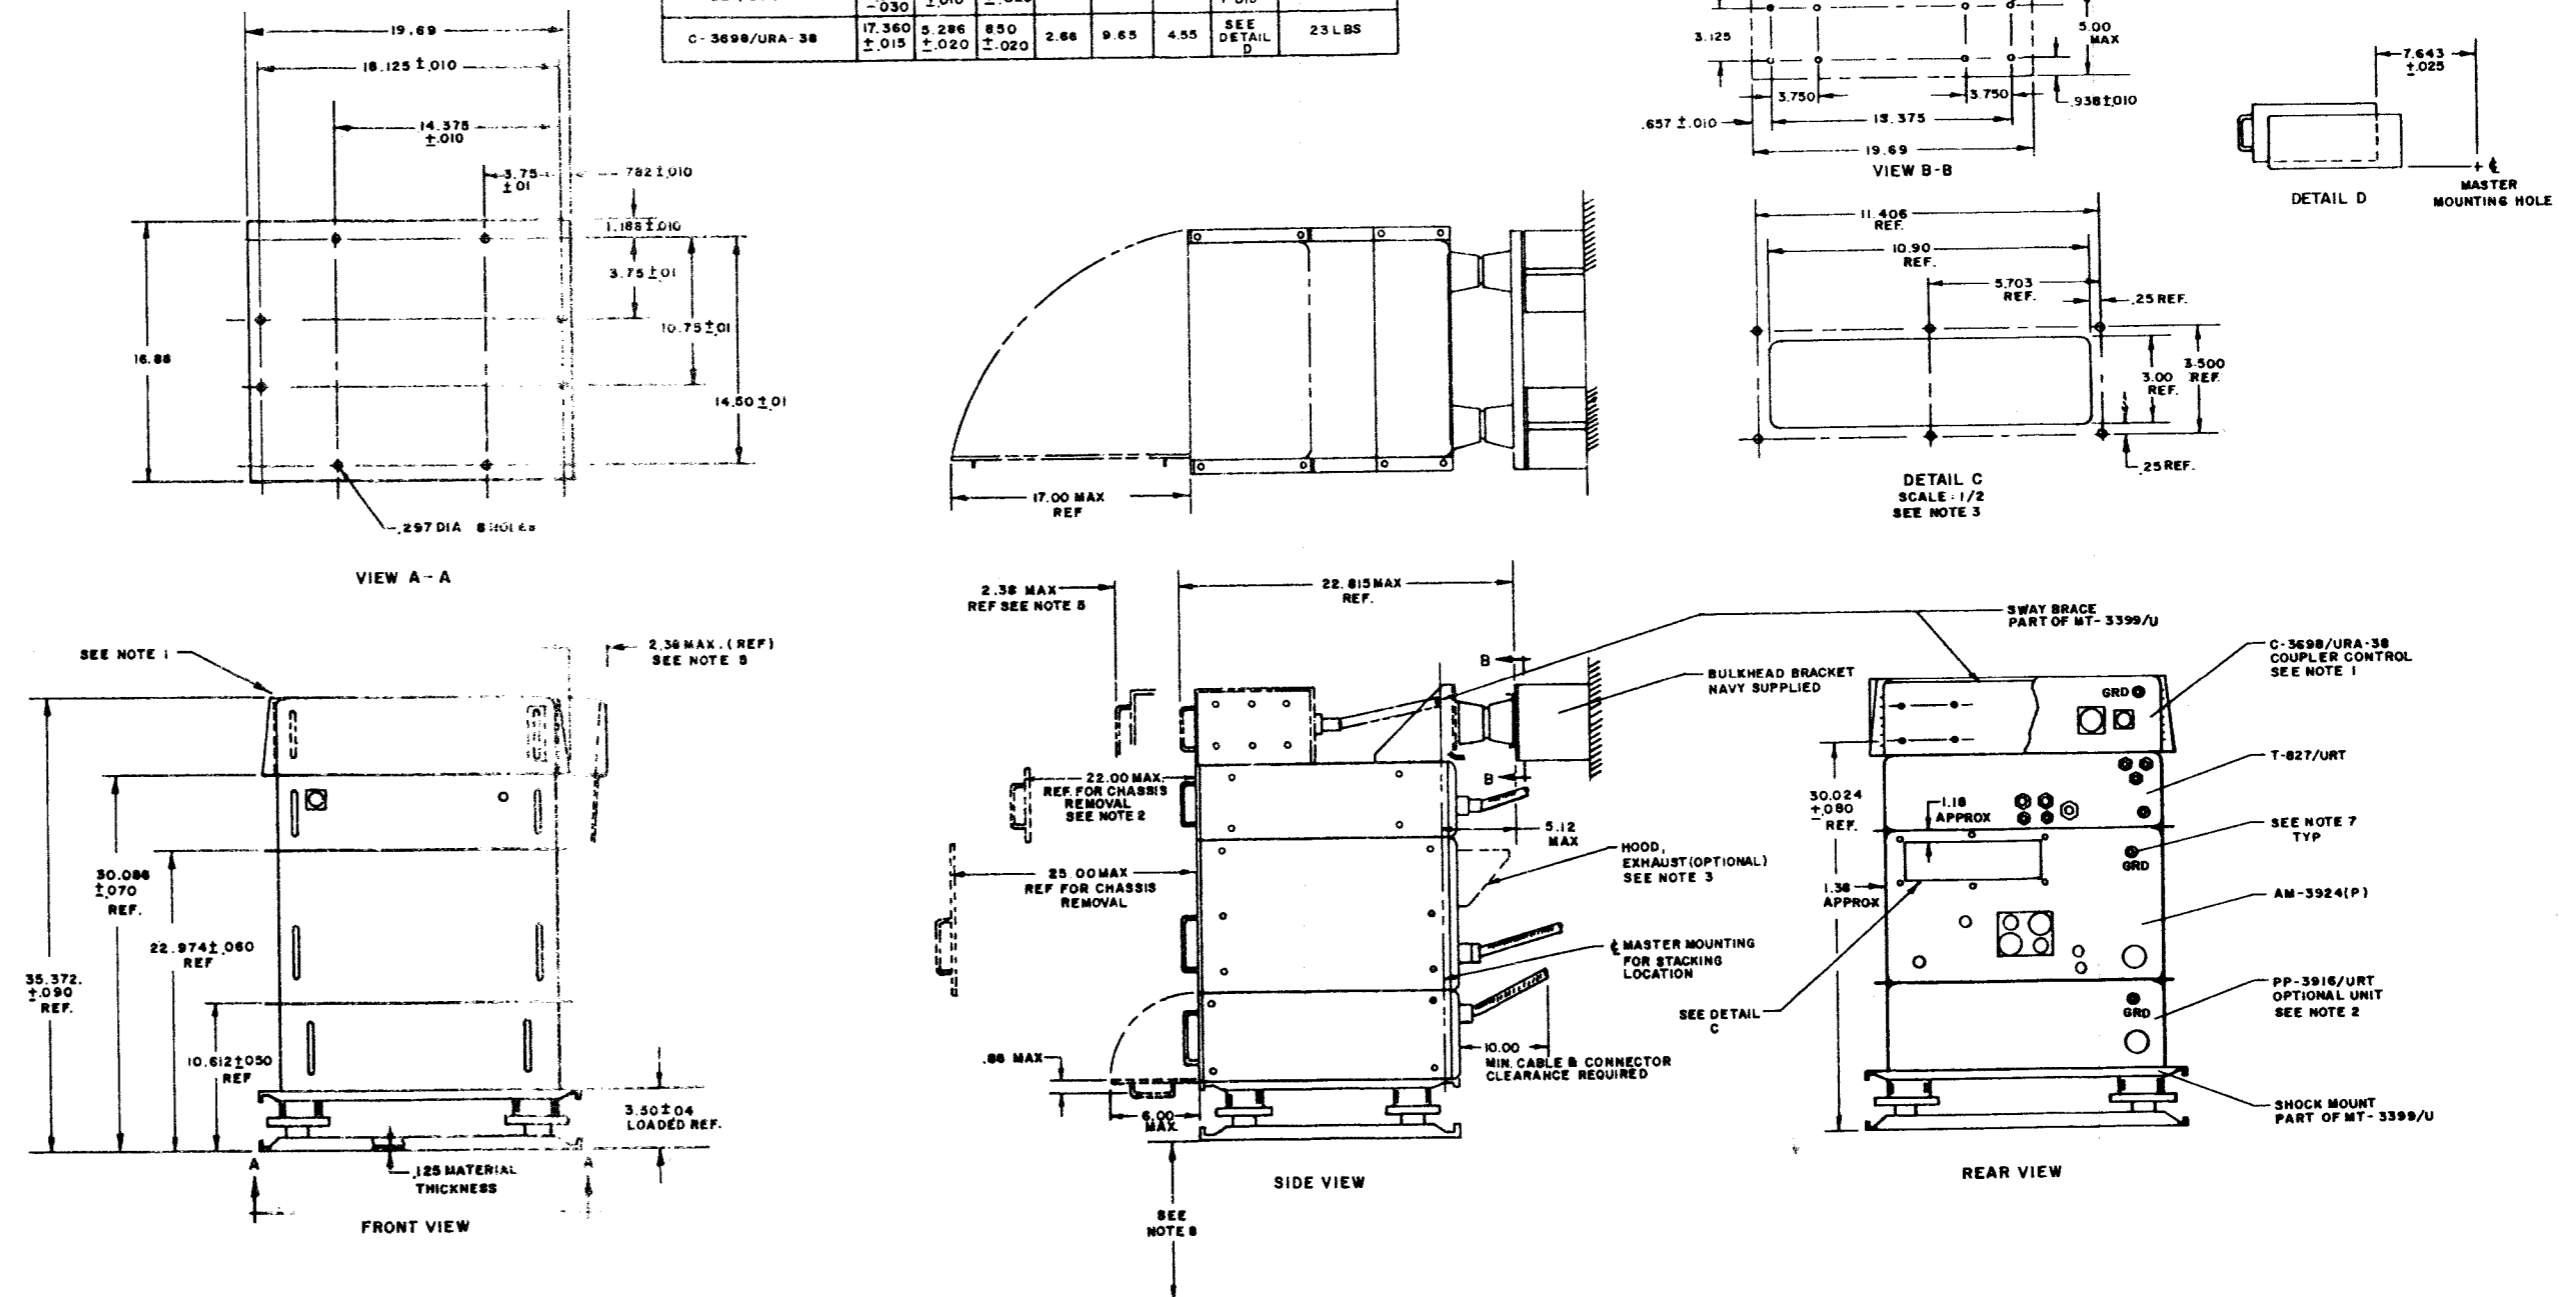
Radio Transmitting Set AN/URT-23(V), Outline and Mounting Dimensions
